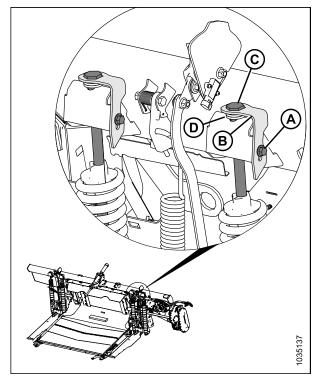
Float Adjustment Bolts – Left Shown, Right is Similar
